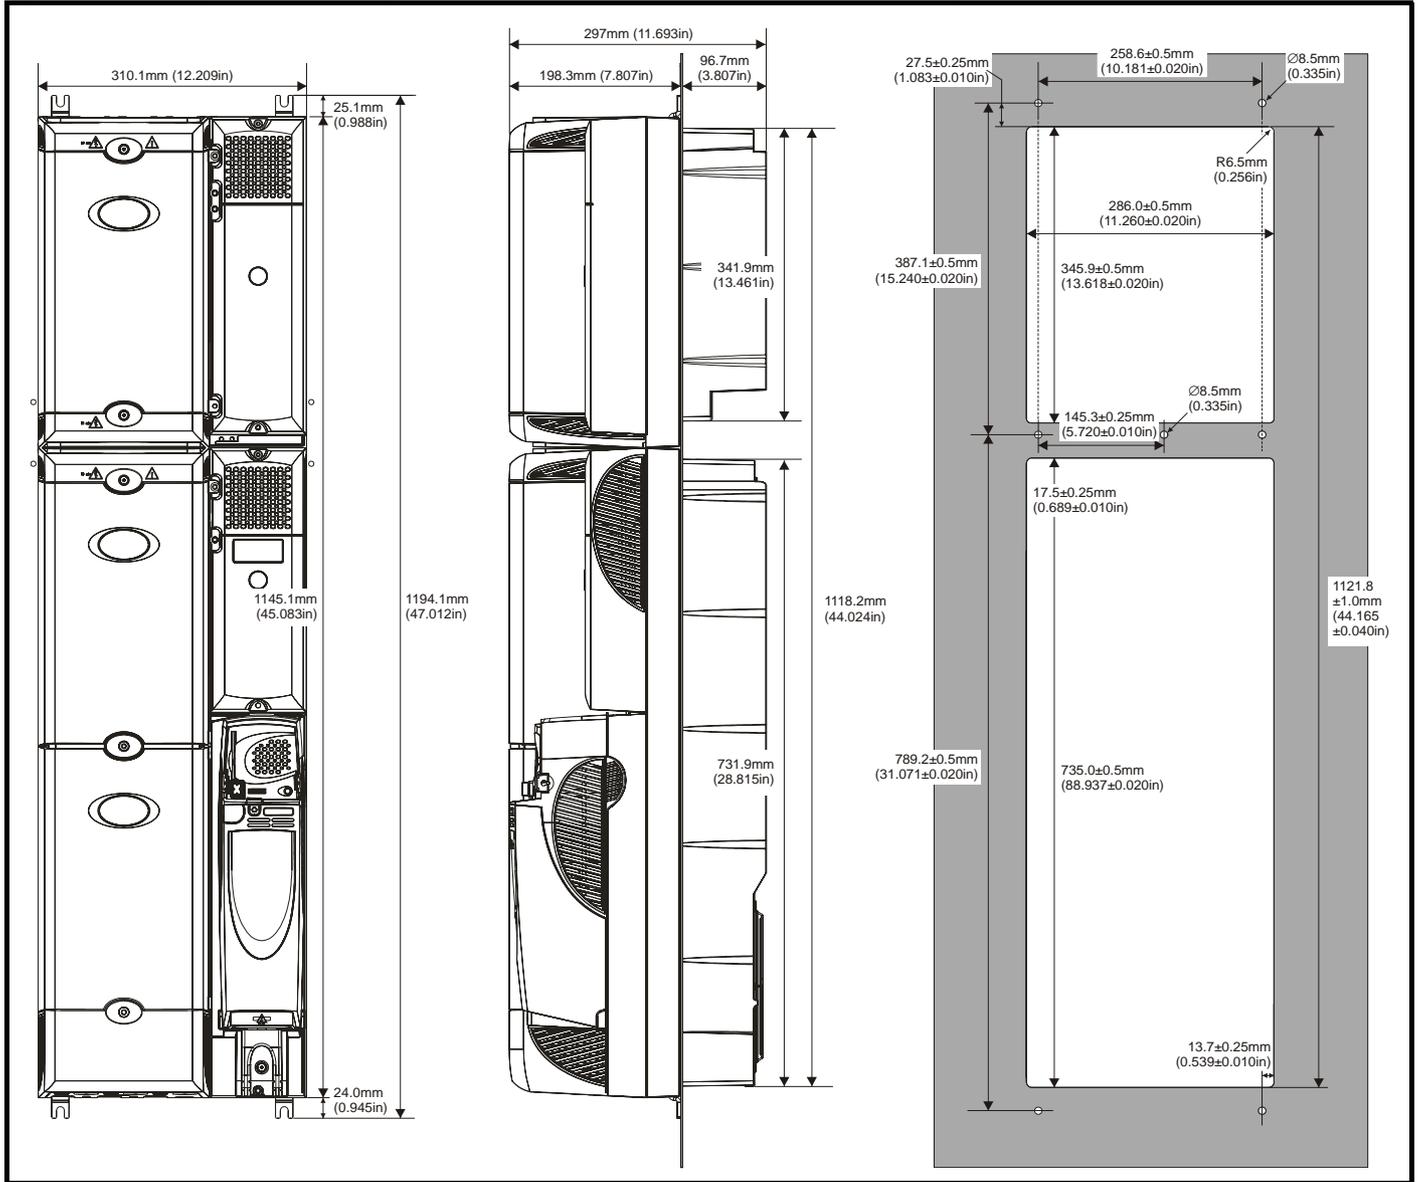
Through-panel mounting the Unidrive SPMD
